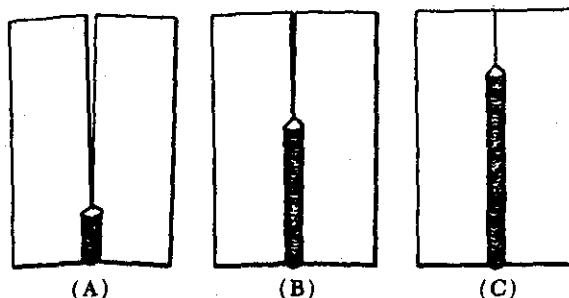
Allowance for a straight butt weld when welding steel sheets.
